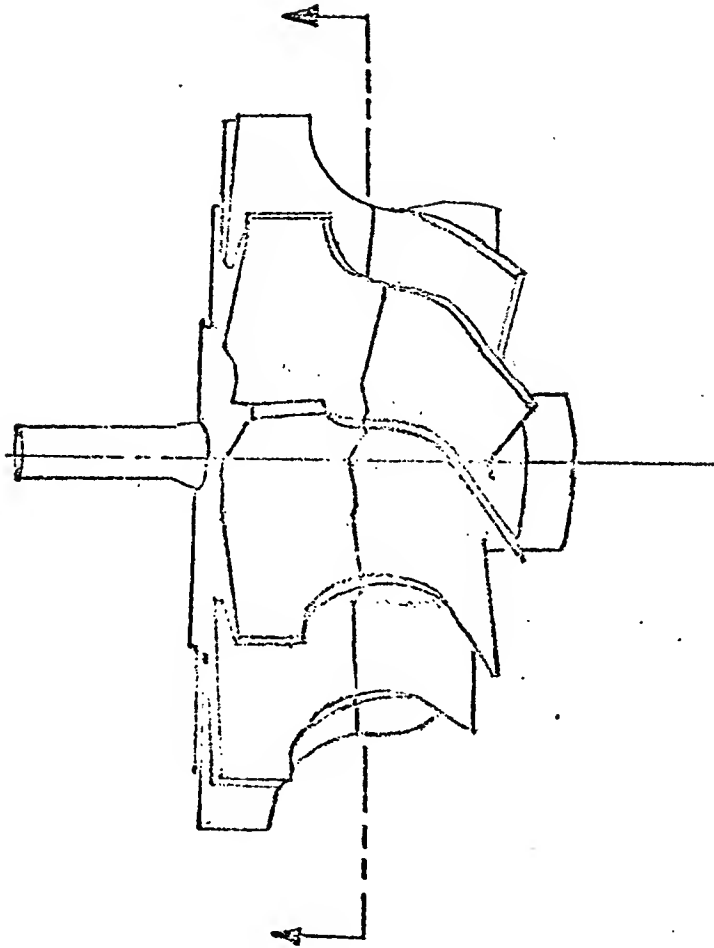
Two-Piece Turbine Wheel Assembly
